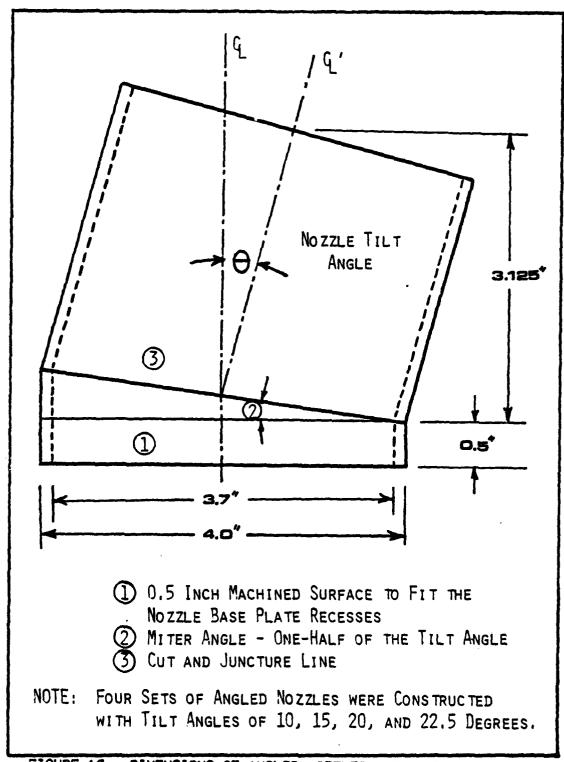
DIMENSIONS OF ANGLED NOZZLES AND NOZZLE TILT ANGLE
